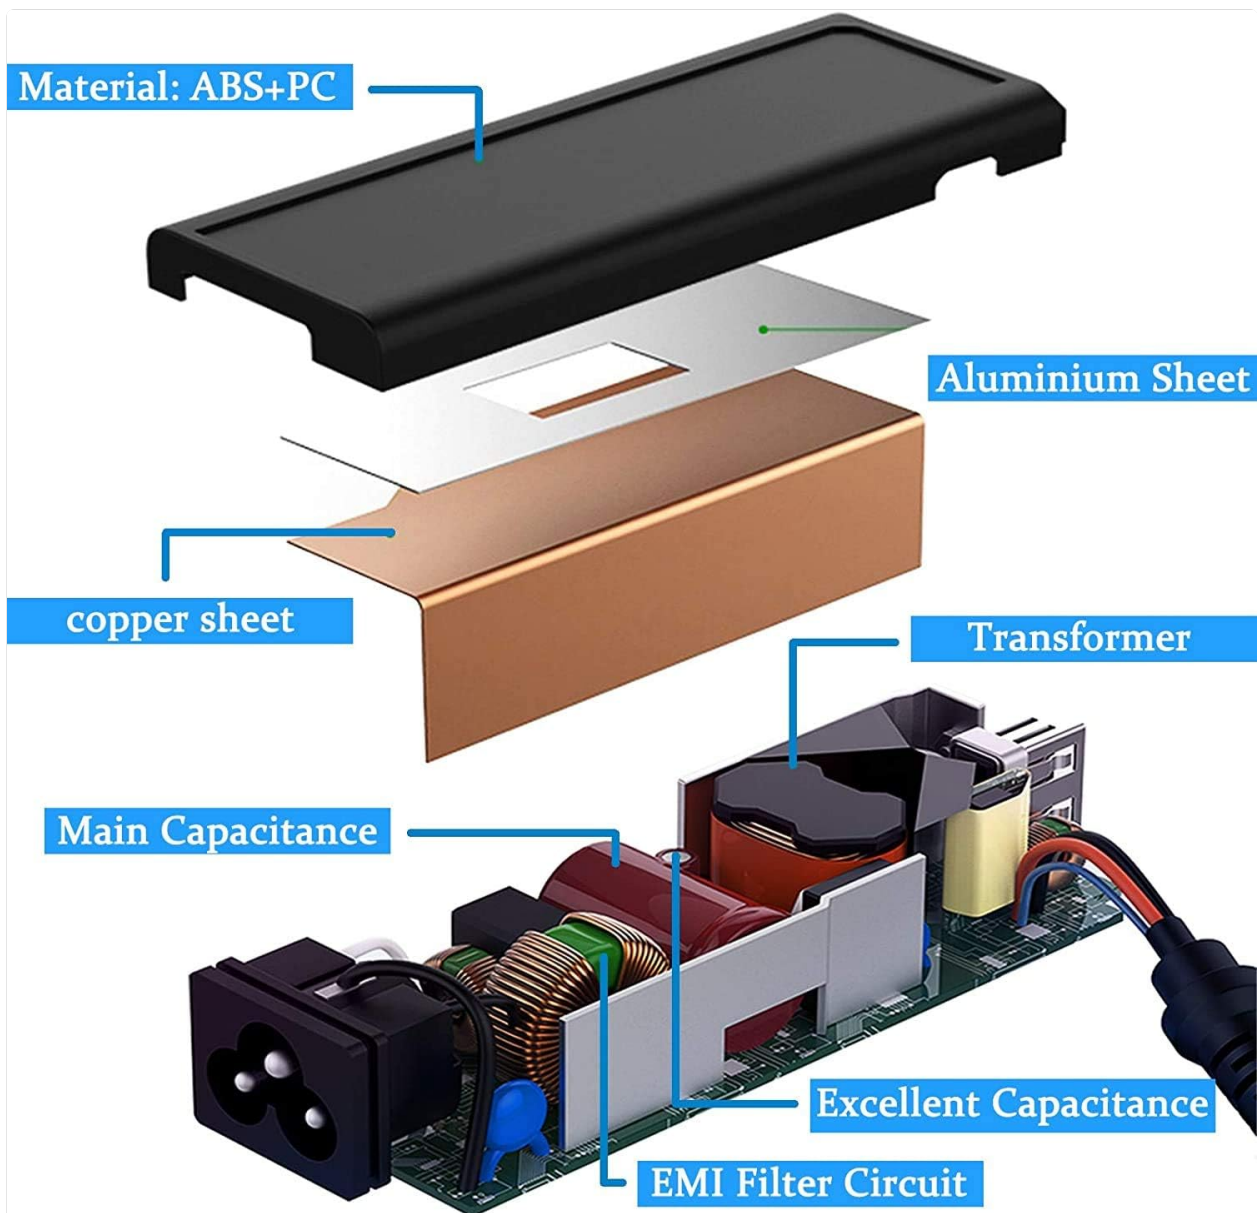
An exploded view of the AC adapter's internal components, including the ABS+PC casing, aluminum sheet, copper sheet, transformer, main capacitance, and EMI filter circuit, highlighting the quality of materials used.
